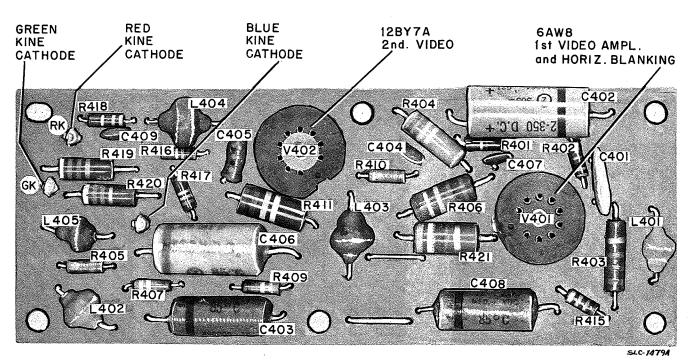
Top View, Printed Circuit Board PW-400, 1st and 2nd Video, Horizontal Blanking-CTC5.
